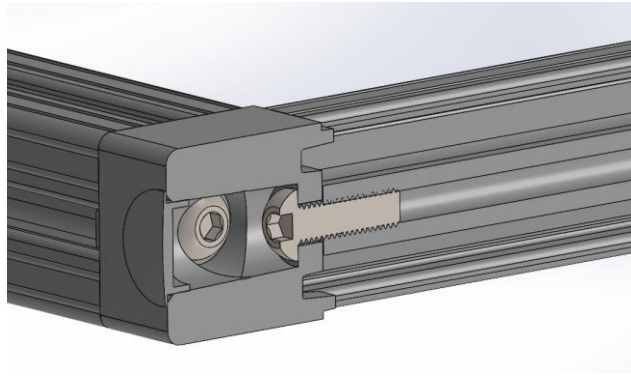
Cross-Sectional View of Corner Mount Attaching to Beam
